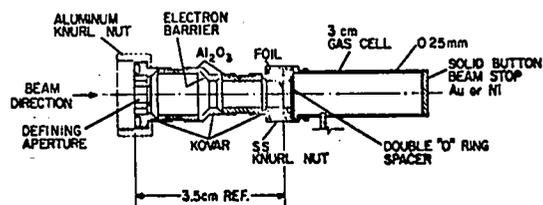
Assembled target showing electron barrier and defining aperture locations.
